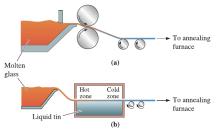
Techniques for manufacturing sheet and plate glass: (a) rolling and (b) floating the glass on molten tin.
